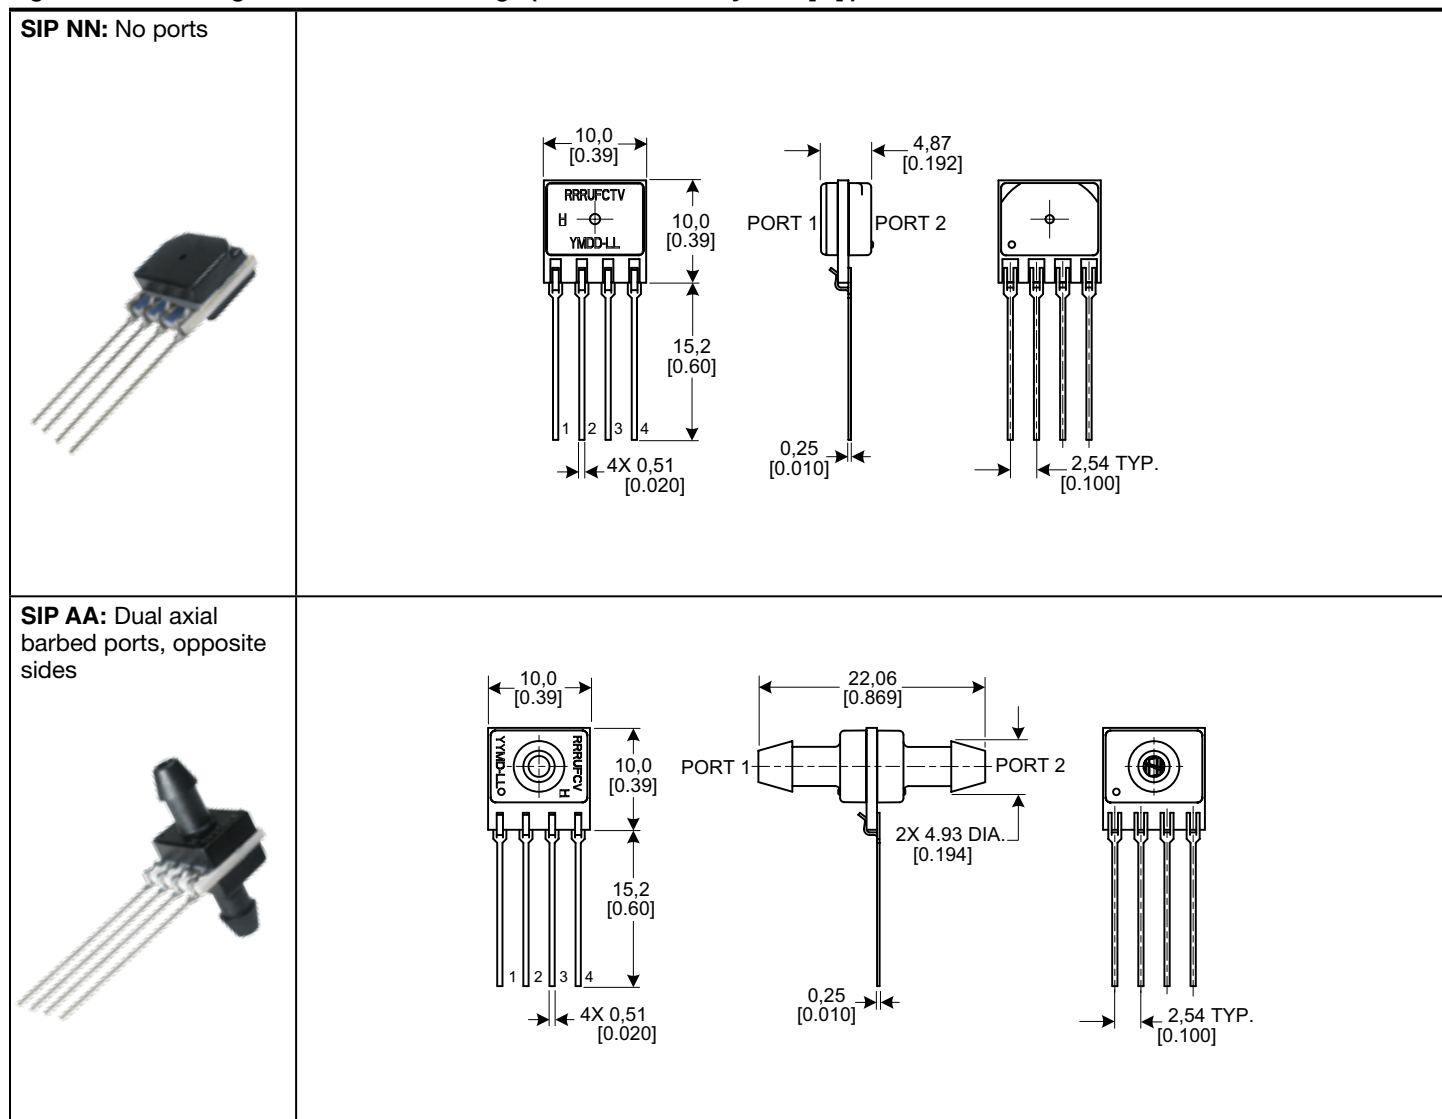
SIP Package Dimensional Drawings (For reference only: mm [in].)
